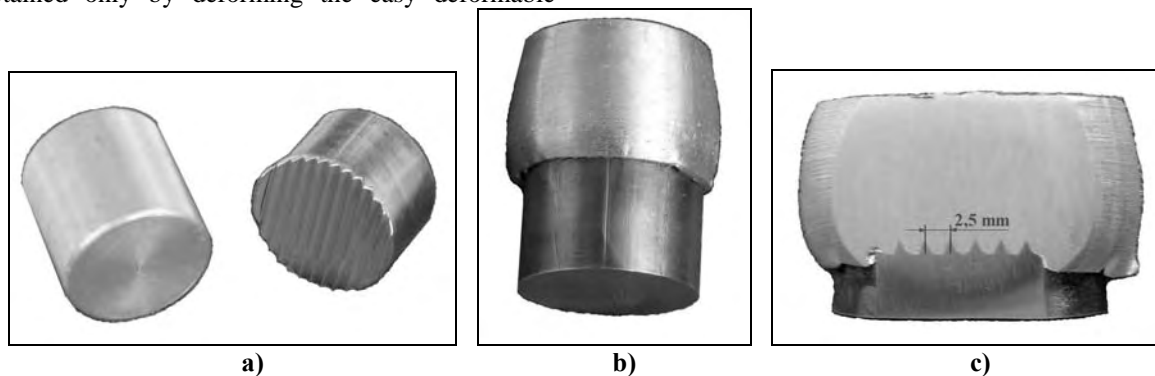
Specimens' components: a) before up-setting; b) welded specimen; c) the brass cogs imprint the aluminum.
